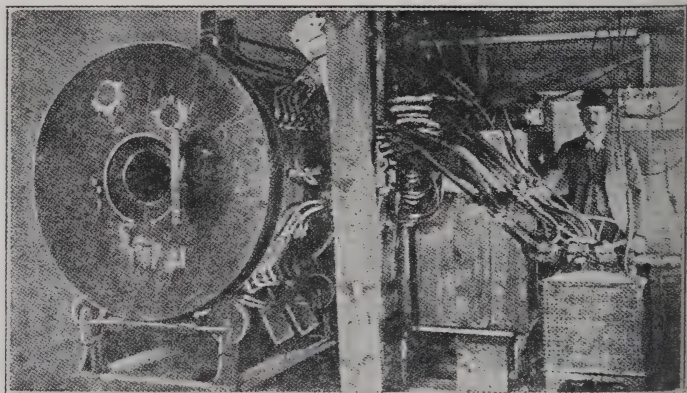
THE "HATCH" FURNACE. SHOWN WITH THE END BOLTED ON
